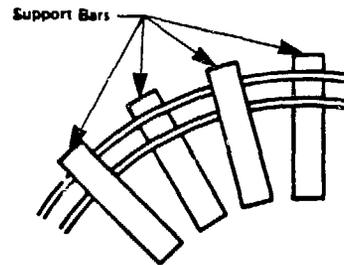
ELBOW TUBE SUPPORT CONCEPT
